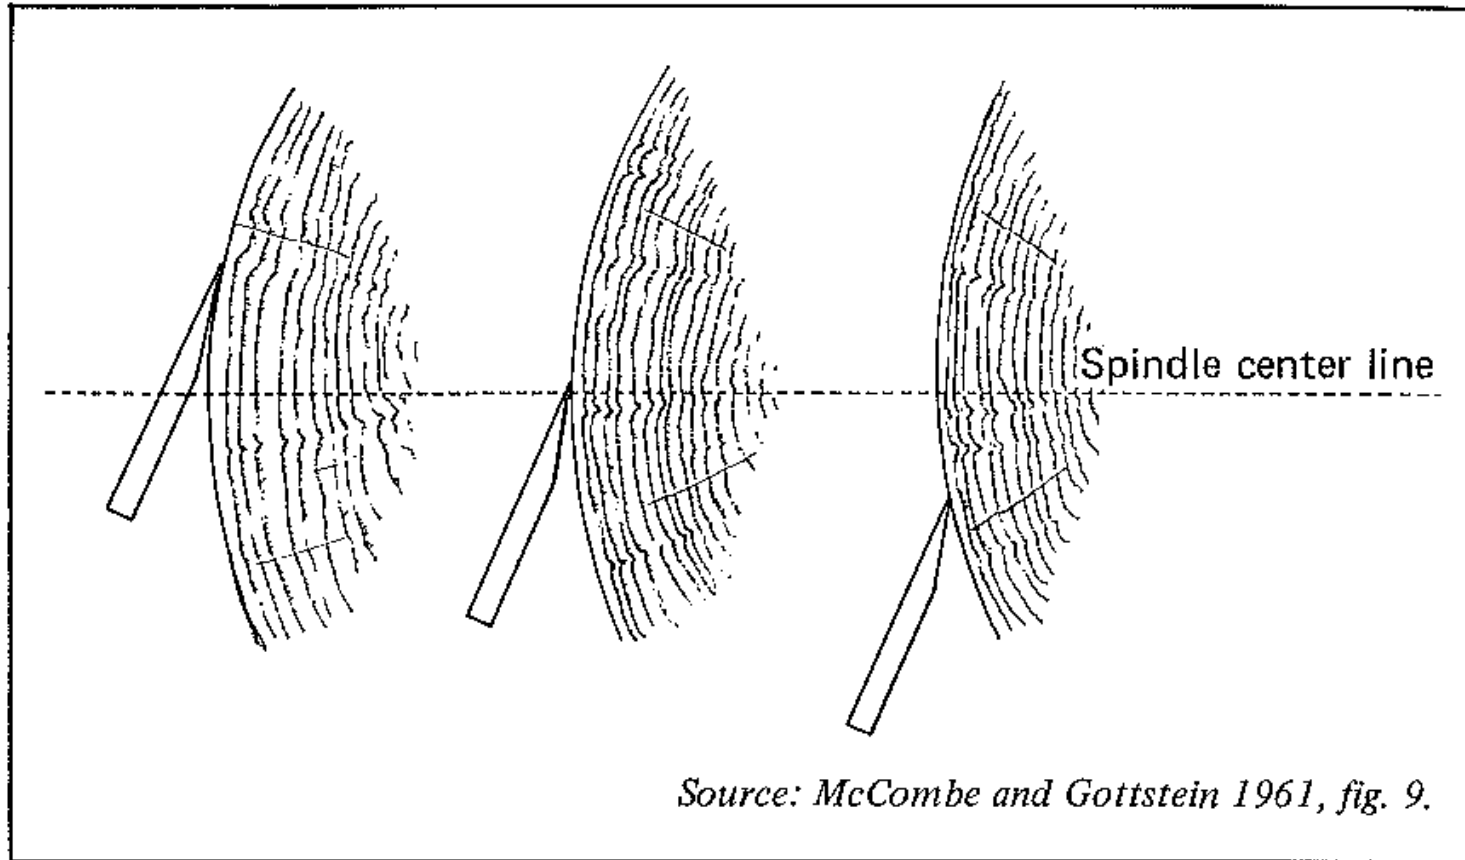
Relationship between knife height and cutting angle. Setting knife above spindle center line decreases knife cutting angle. Setting it below spindle center line increases the knife cutting angle.
